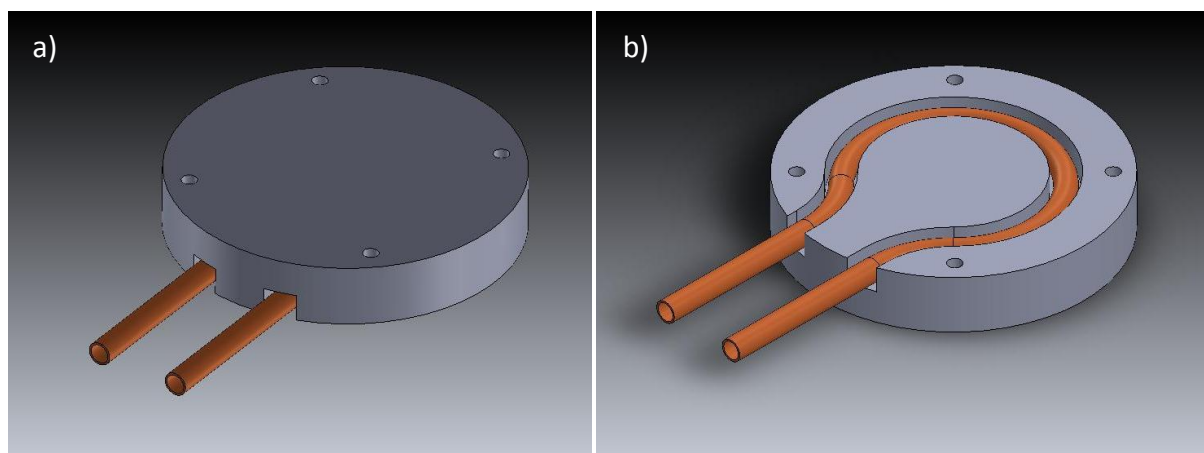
a) Top view of cooling stage design. b) Bottom view of cooling stage.
